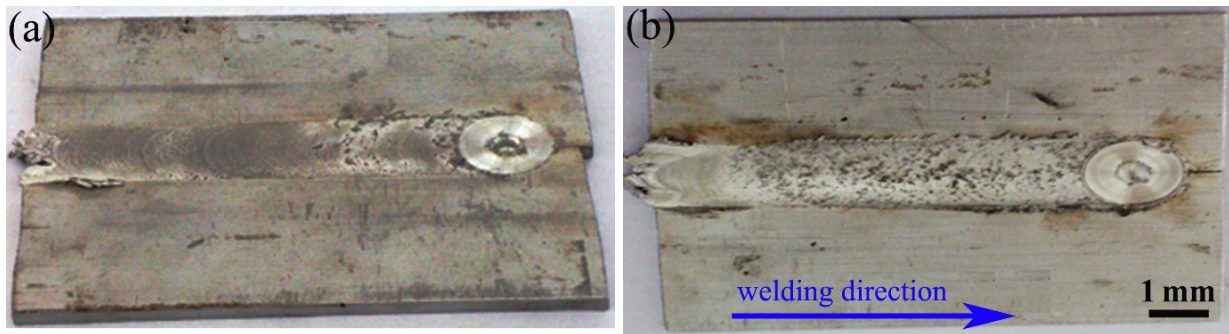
The visual appearance of the friction stir welding joints with crown formation (a) water cooled (underwater welding) and (b) air cooled samples.
